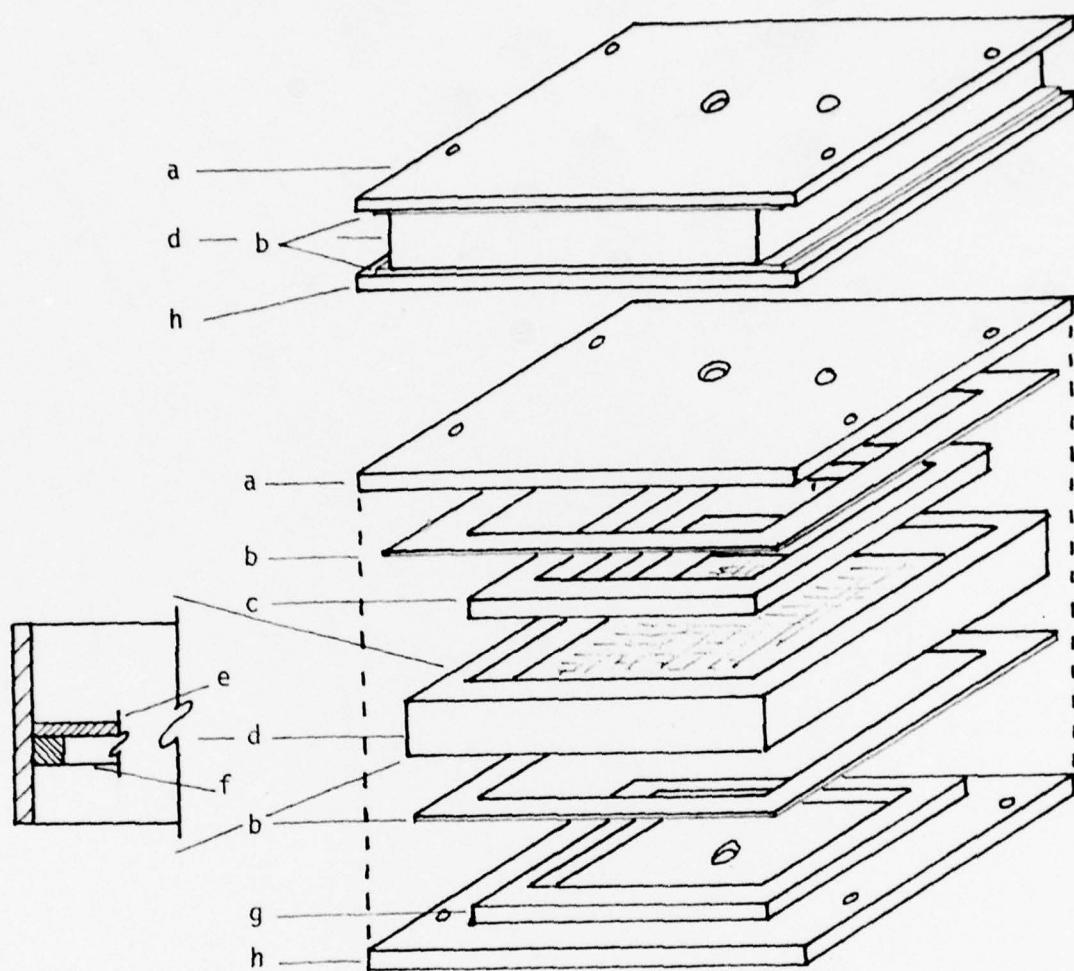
A Diagram of the Large Volume Filter Chamber: a, top plate; b, silicone rubber gaskets; c, filter retaining ring; d, filter support section; e, screen; f, screen support flange; g, bottom plate covering flange; h, bottom plate.
